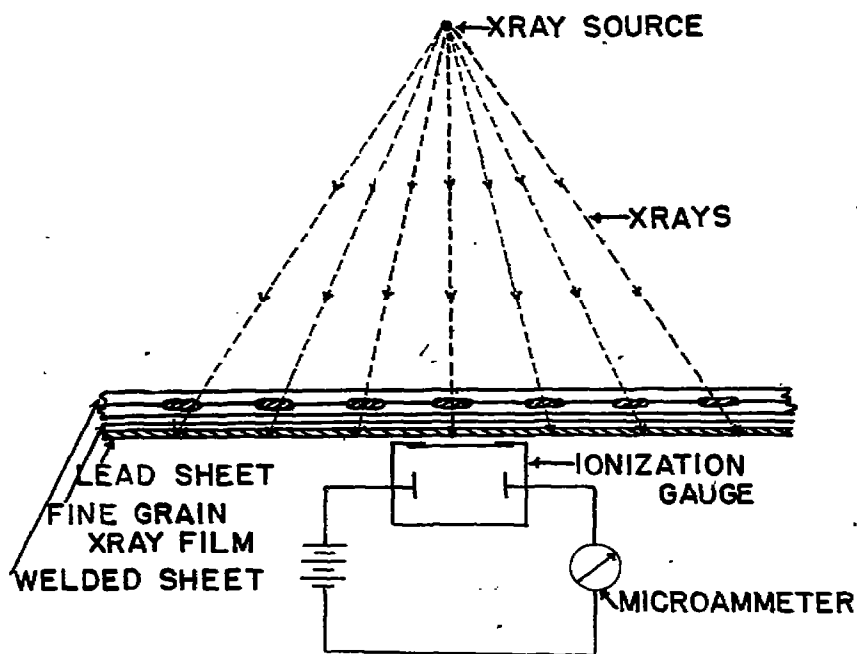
ARRANGEMENT OF EQUIPMENT FOR IONIZATION GAUGE TESTS OF SPOTWELDS.
